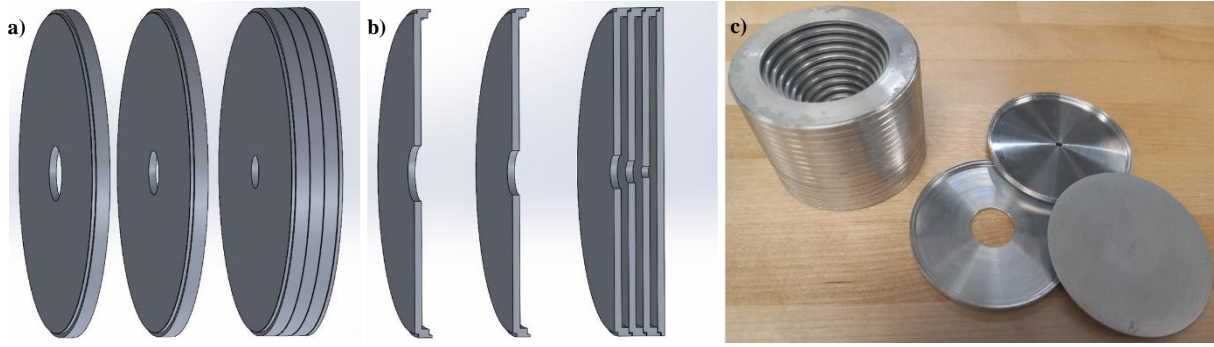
Design of the manufactured technical solution: a) 3D global view and b) 3D cross-section of the modelling of single and assembled parts; c) picture of single and assembled parts machined in aluminum.
